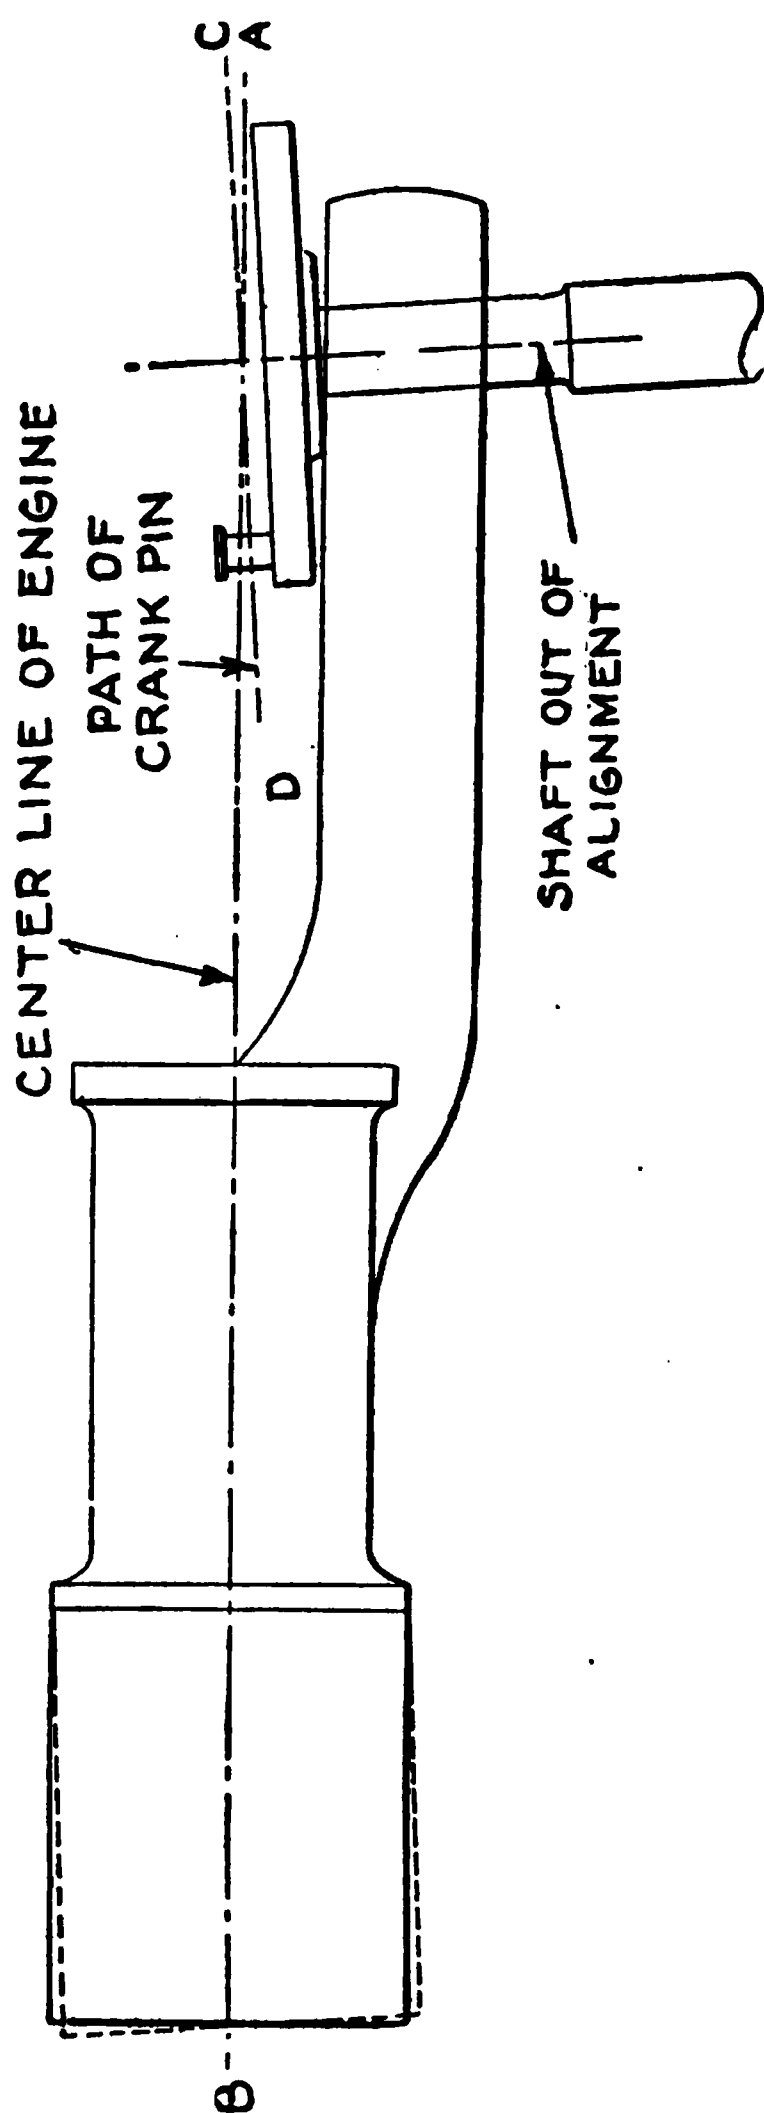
,032.—Bad alignment: shaft out of line with the cylinder axis causing a side slap or knock at the crank pin if the brasses have any side clearance.
